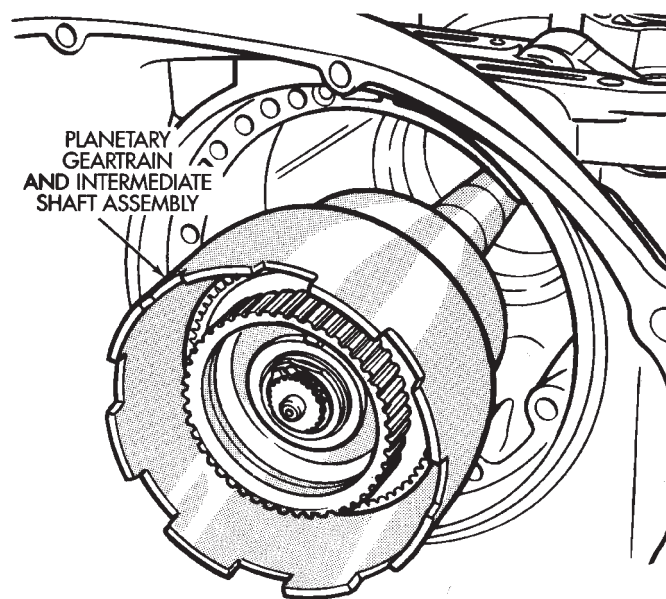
Removing Planetary Geartrain And Intermediate Shaft Assembly
